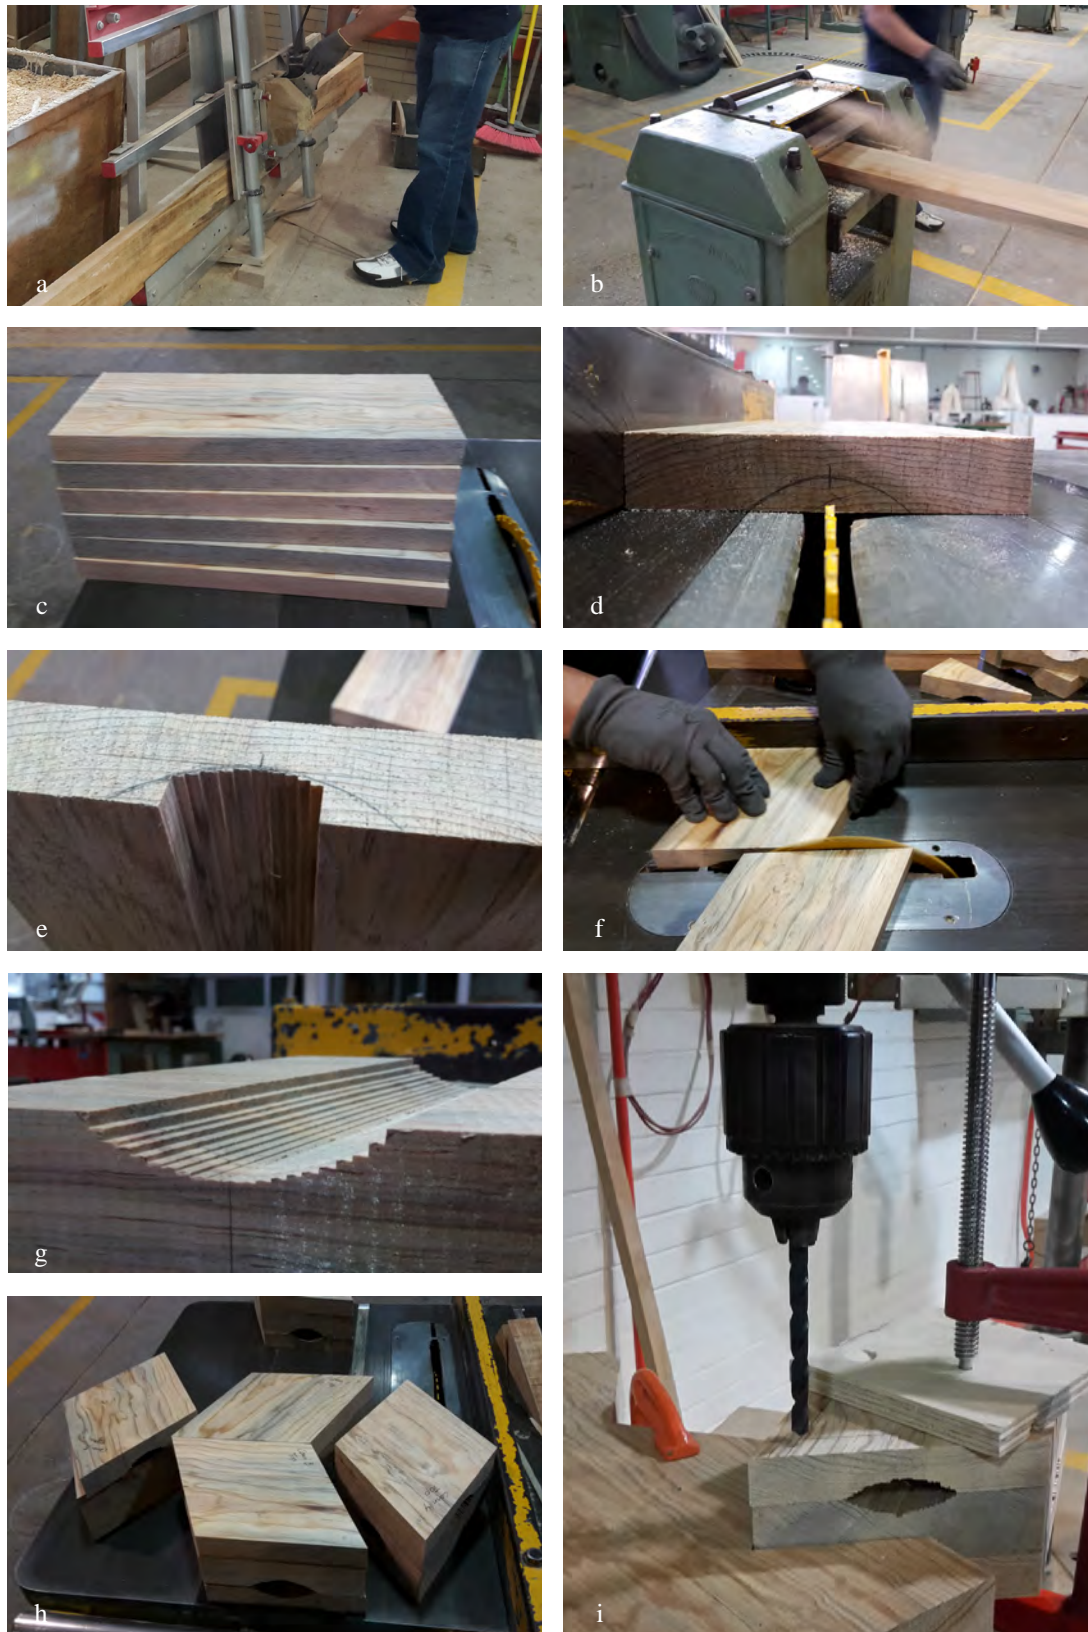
Fabrication method for the timber connection. (a) Longitudinal cut of timber planks. (b) Sander planer machine to create a flat surface. (c) Timber plank sections to use for each connection. (d) Cutting of the groove. (e) Groove cuts. (f) Transverse cutting. (g) Groove finishing. (h) Timber blocks. (g) Drilling of the holes.
